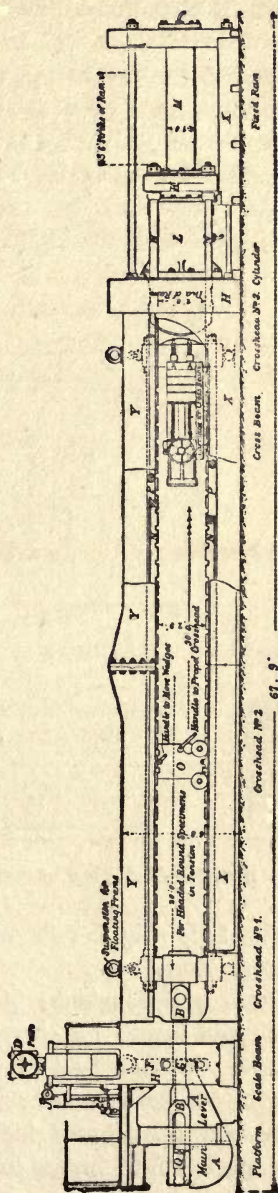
Side Elevation of 300-ton Testing Machine in Birmingham University.
